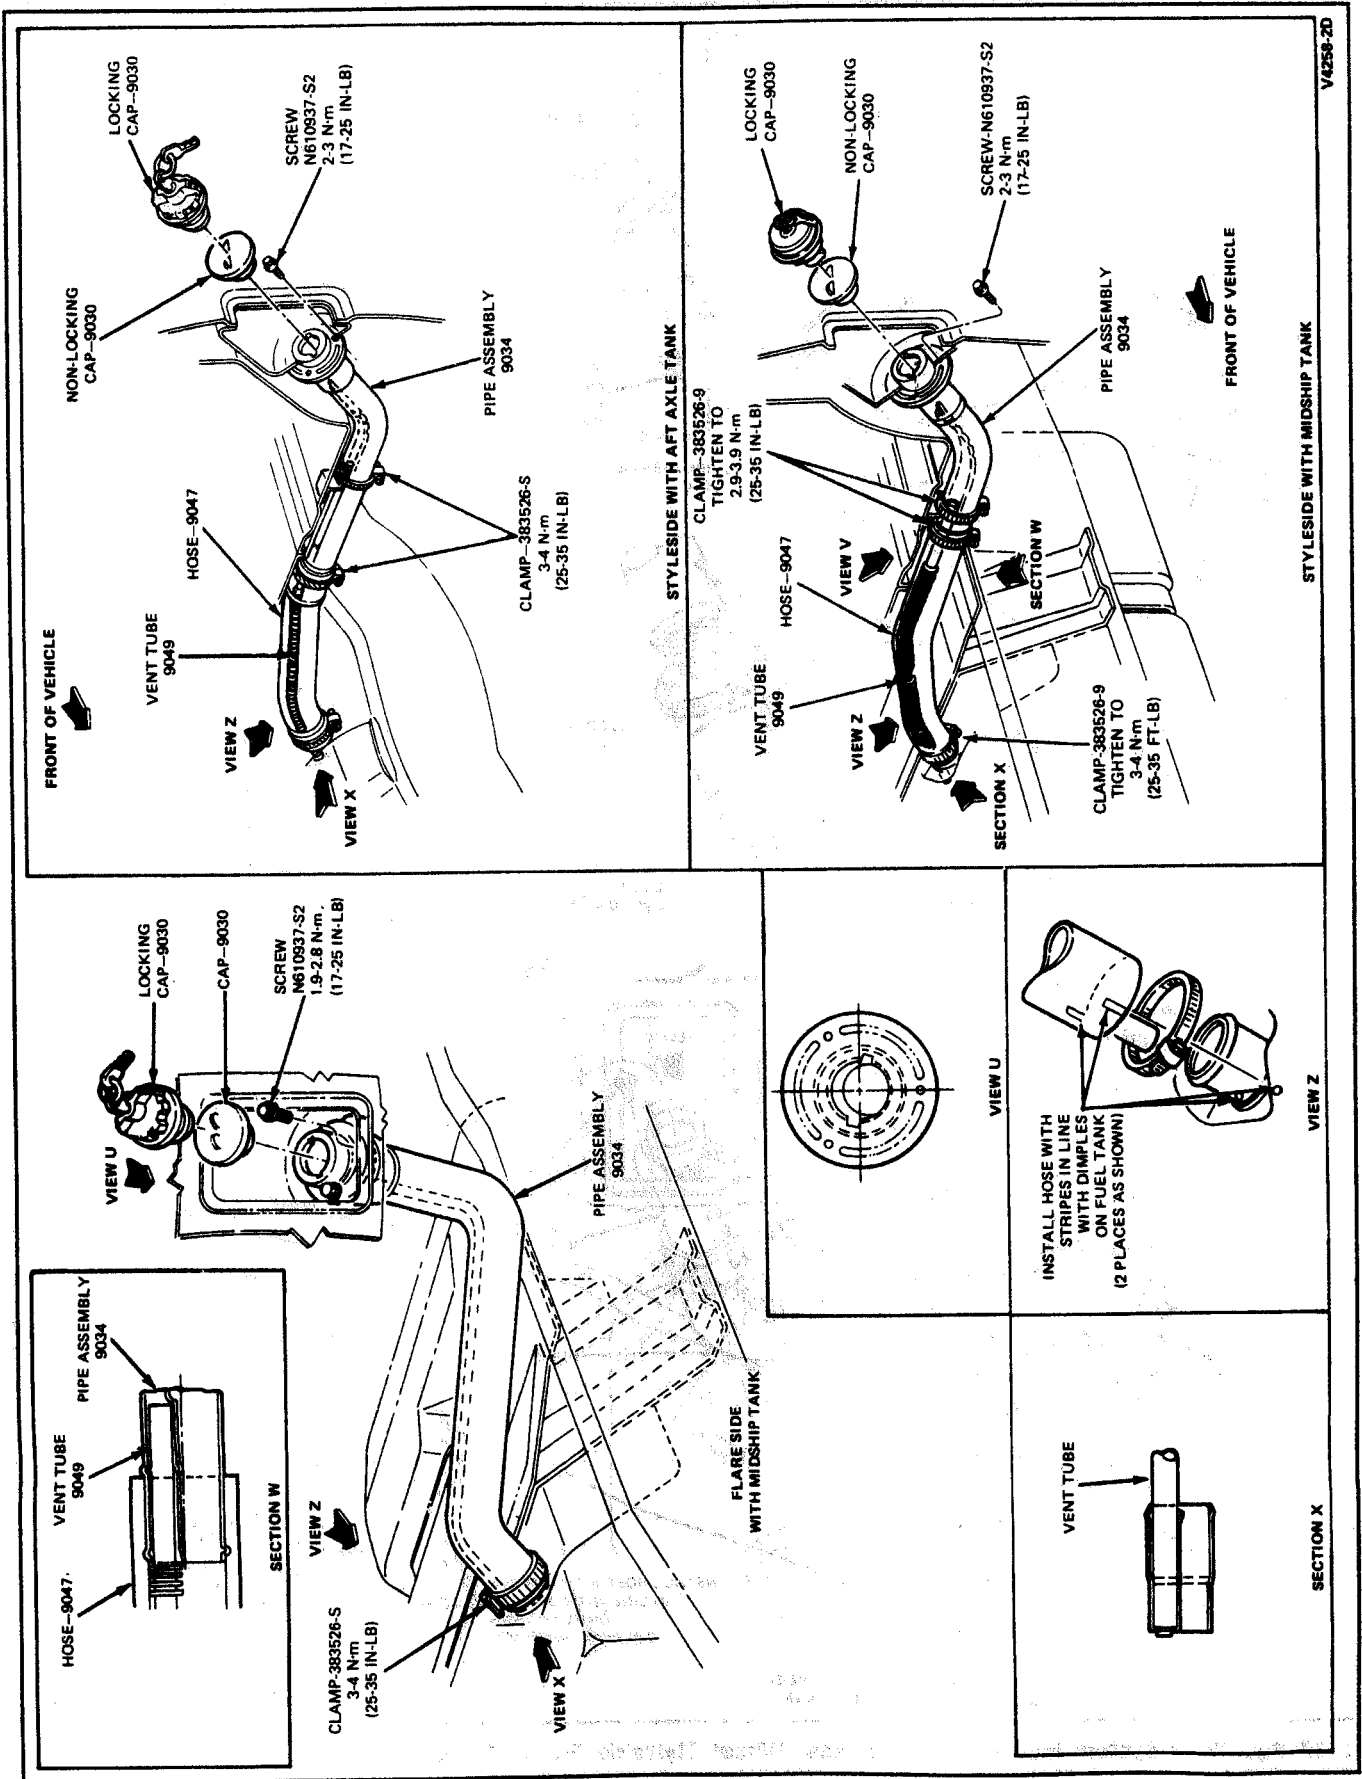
Fuel Filler System Installation—Single Rear Wheel Style Side F-250—F-350
